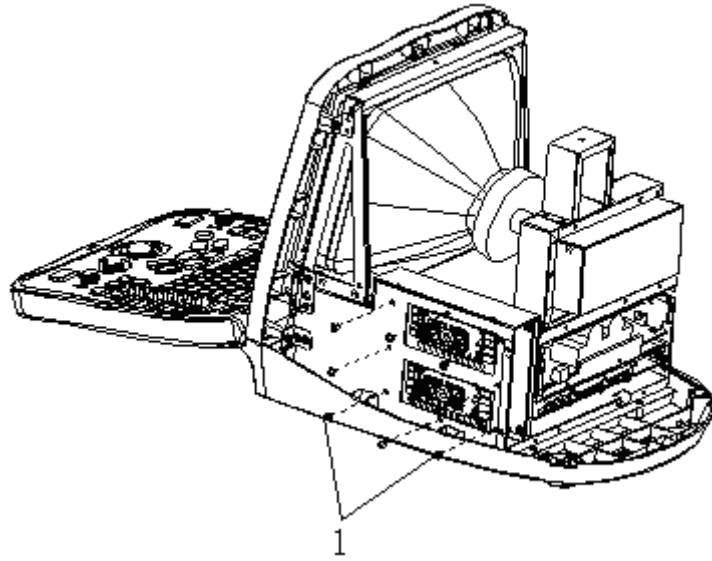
Sketch Map of Probe Board and Main Board Disassembly (1)
